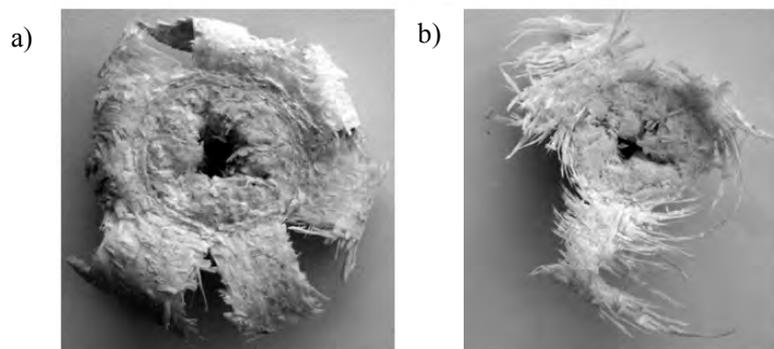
View of crushed single tubes investigated in: a) static tests, b) dynamic tests
